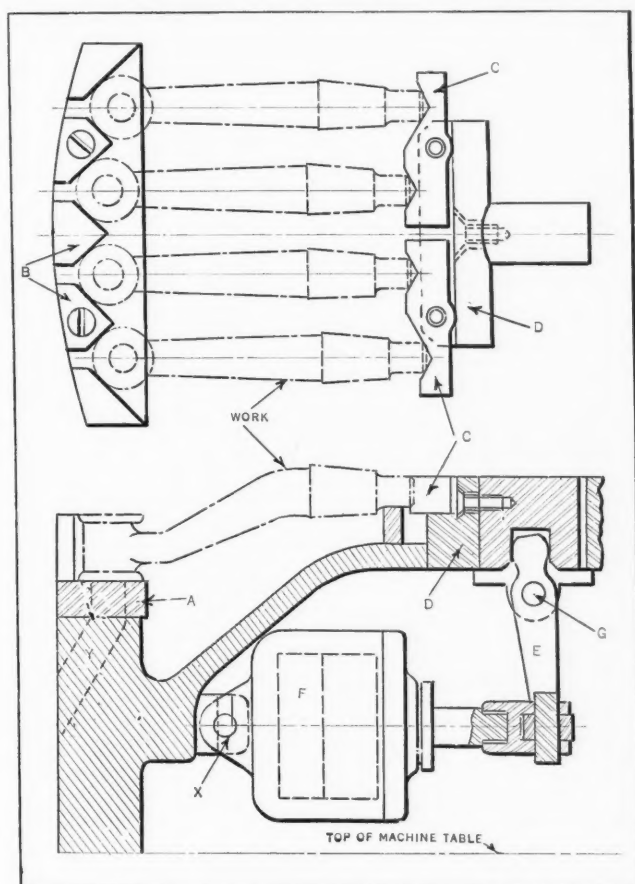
Drill Jig for Holding Four Automobile Steering Arms
